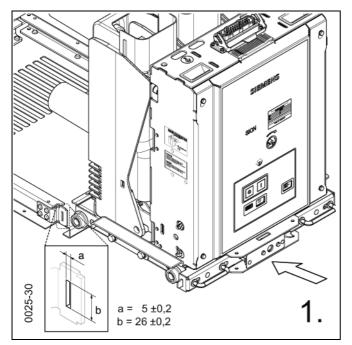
Example of insertion in guide rails with the dimensions of the slots
